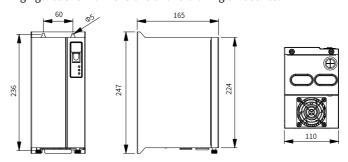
Dimensions of MDBUN series braking units (MDBUN-45-2T to MDBUN-90-2T;
